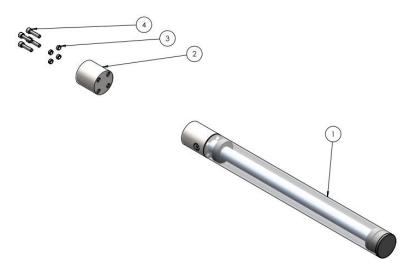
Roller Assembly Exploded View - Mounting Portion (Gallarus Industry Solutions A09 Roller Assembly)
